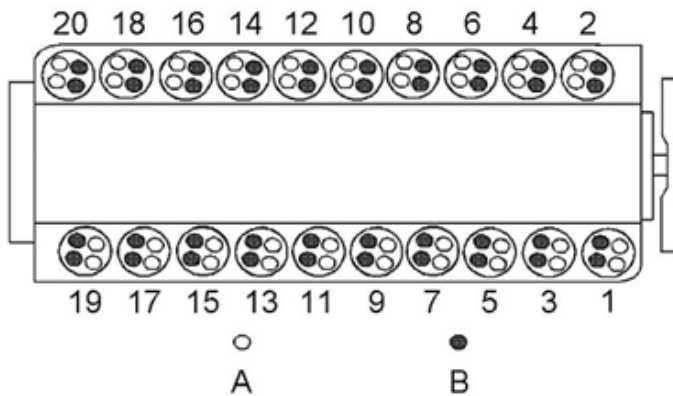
The arrangement of cylinders and valves of the internal combustion engine (ICE);
